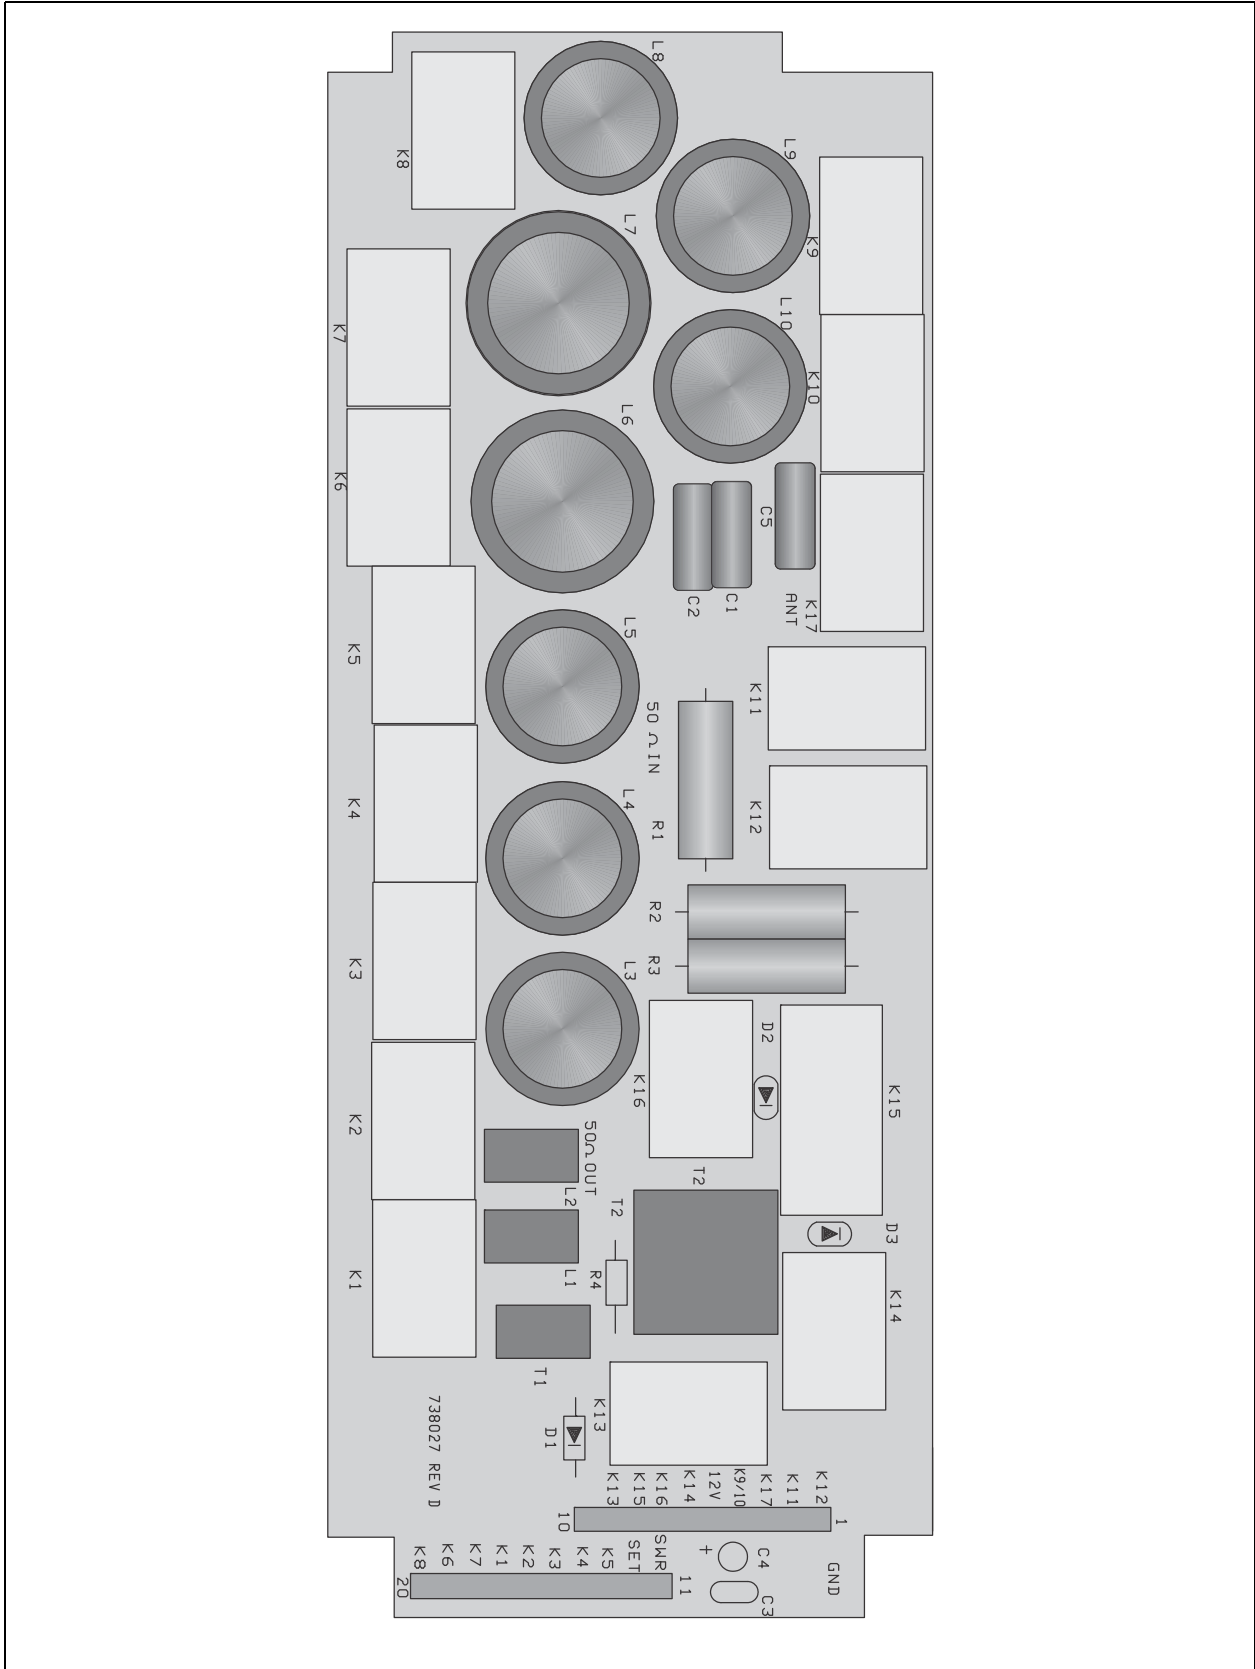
Antenna Tuner Board Component Locations (738027 Rev. D)
